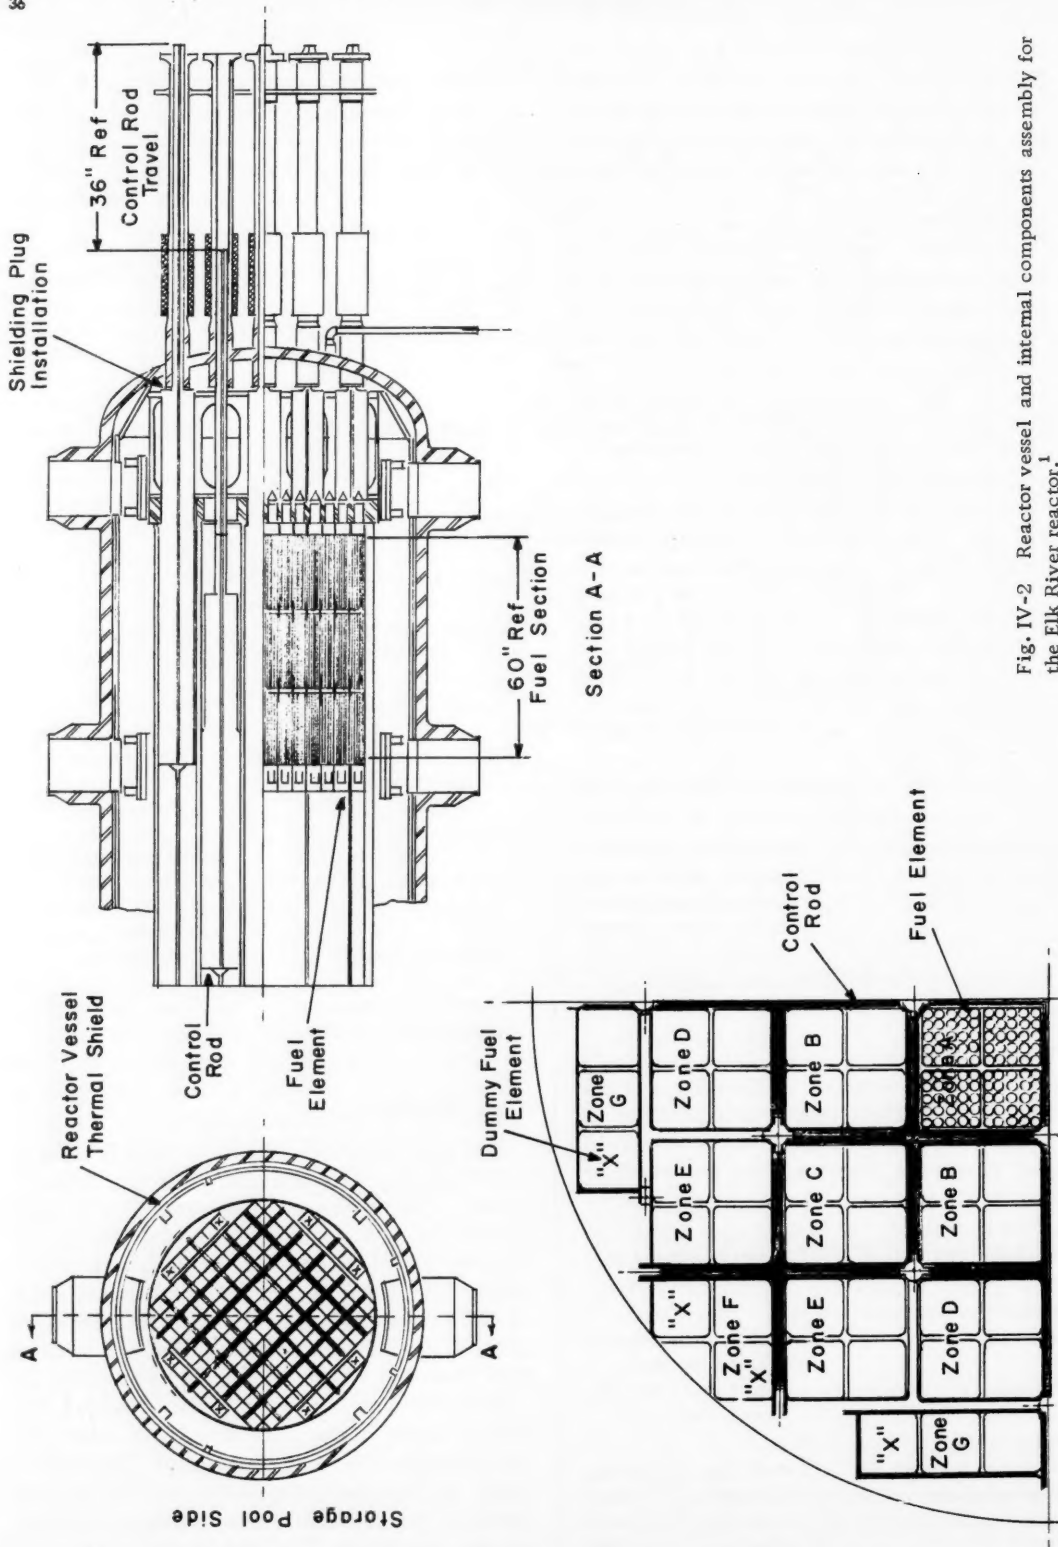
Reactor vessel and internal components assembly for the Elk River reactor.¹
